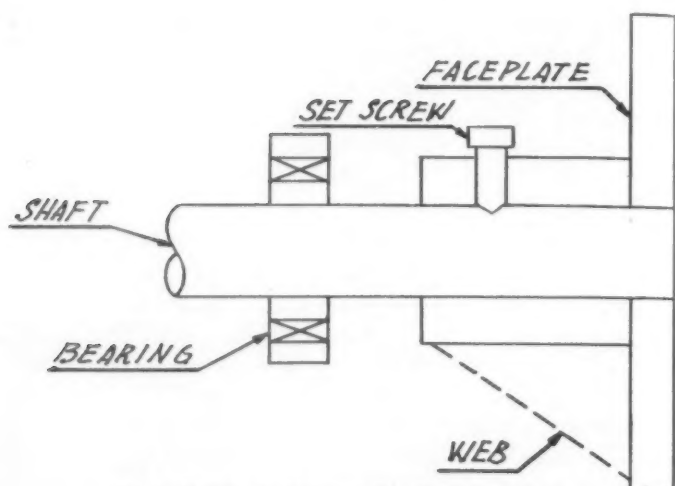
METHOD OF ATTACHING FACE-PLATE TO A SHAFT.
